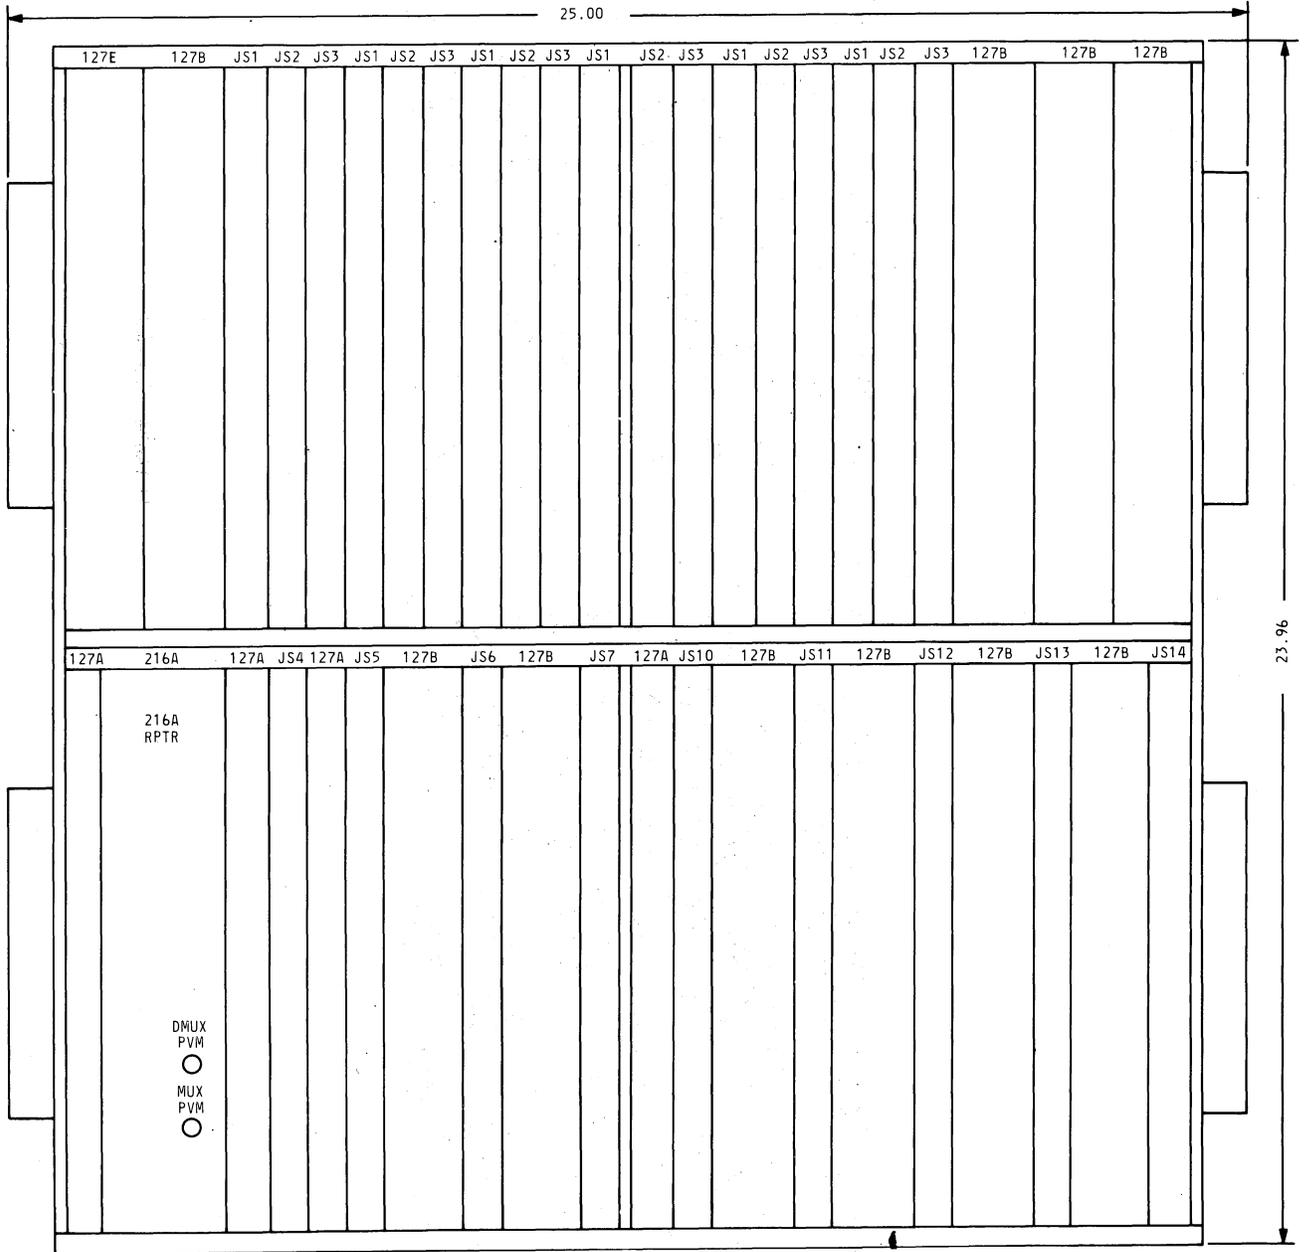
M34 Muldem Shelf Assembly—J98723AB
